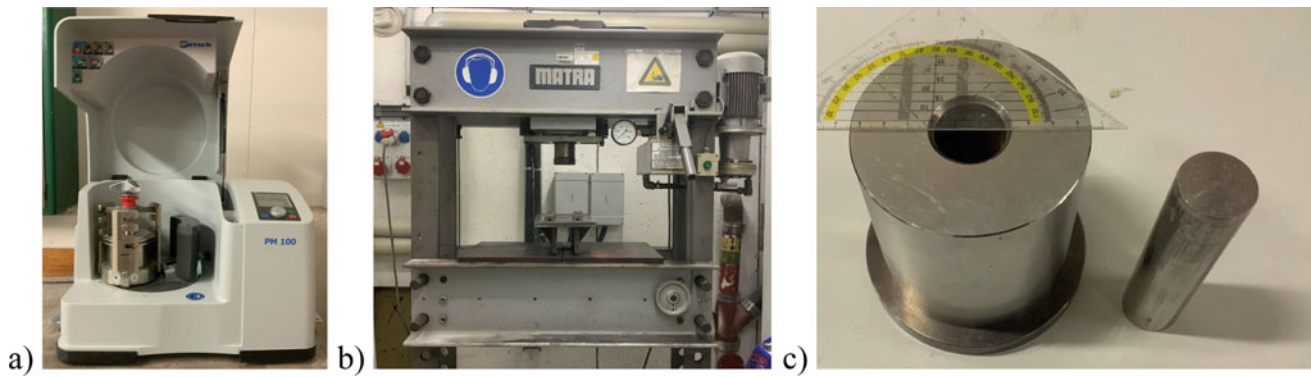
a Retsch PM 100 planetary mill, b MATRA hydraulic press, c die for pressing specimen of 30 mm \varnothing
